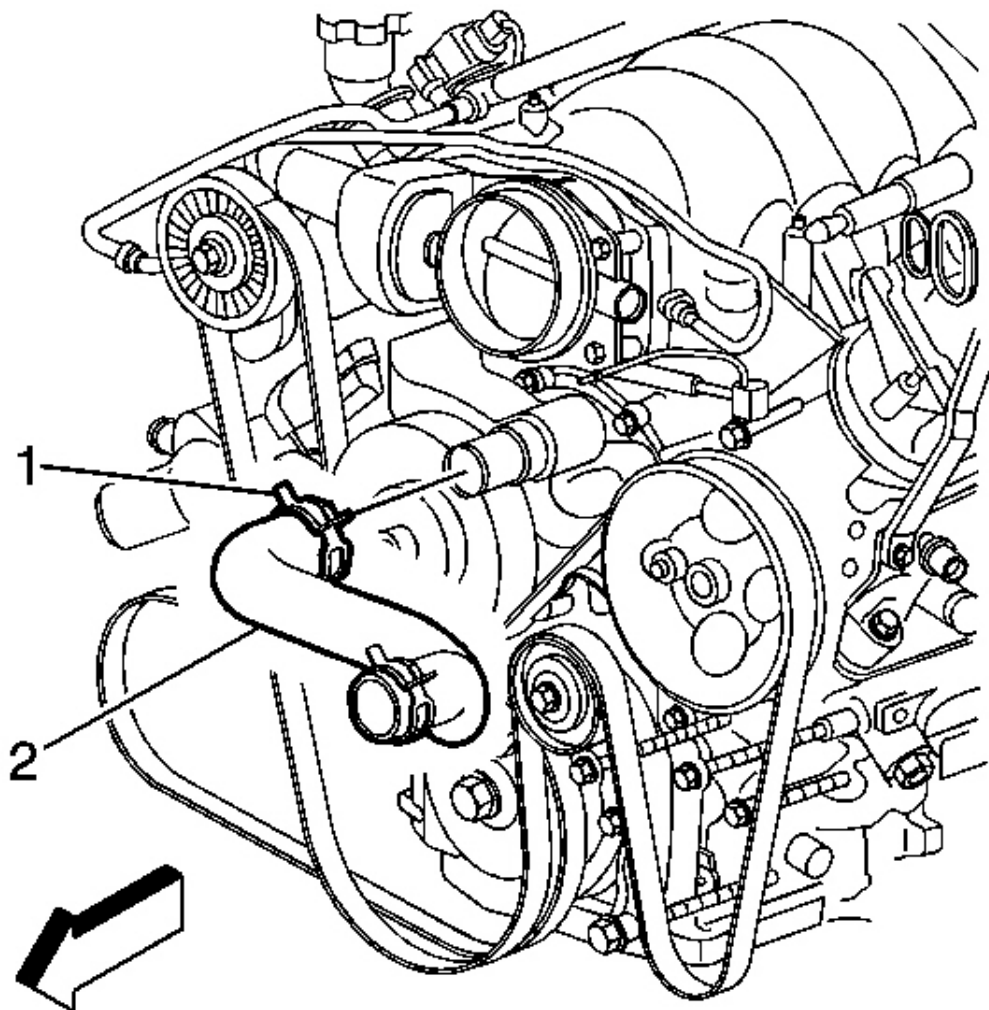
Radiator Inlet Hose & Clamp At Engine
